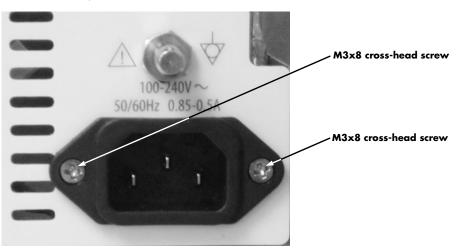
Remove Two (2) M3x8 cross-head screws.
